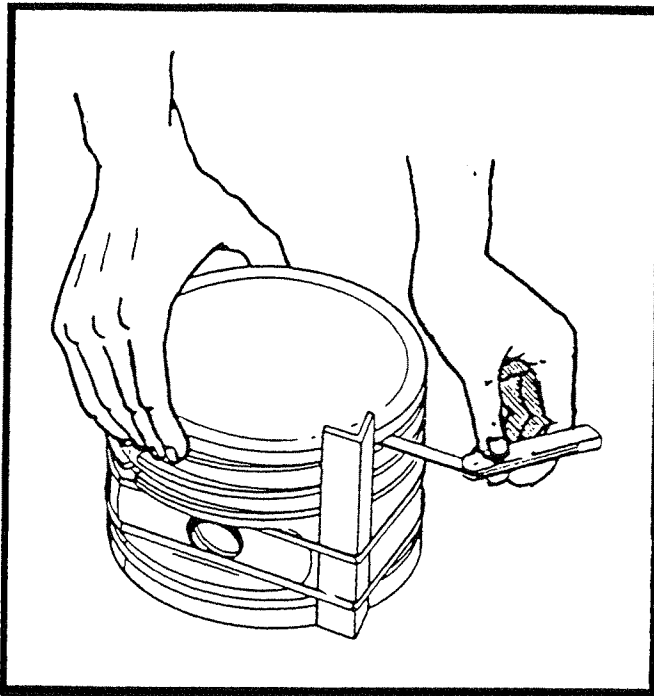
A. INSPECTING RING SIDE CLEARANCE.
